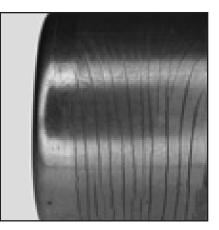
Very high loading resulted in outer ring sub case fracture of this needle roller bearing.
